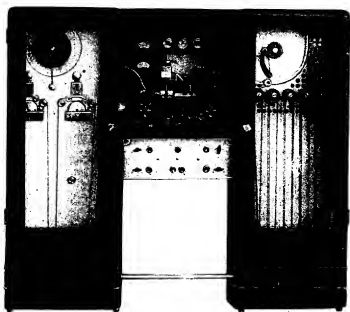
35-MMHC-3 Subtitle Making Machine for Mechanical Printing
